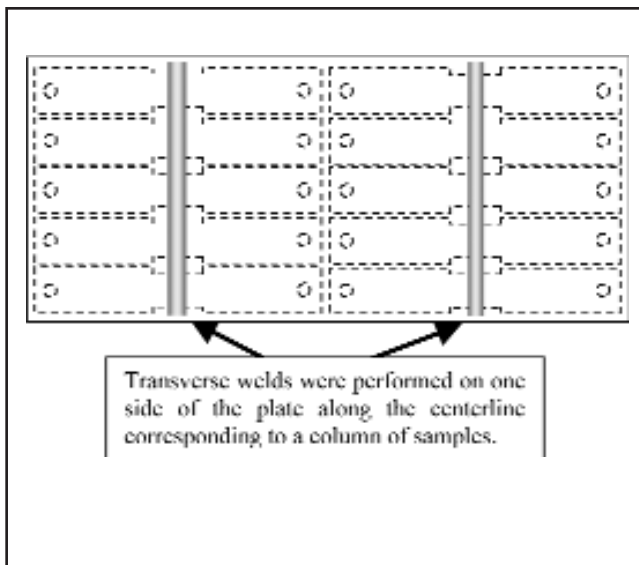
Example of sample layout showing location of transverse welds performed on one side of the plate along the centerline corresponding to a column of samples.
